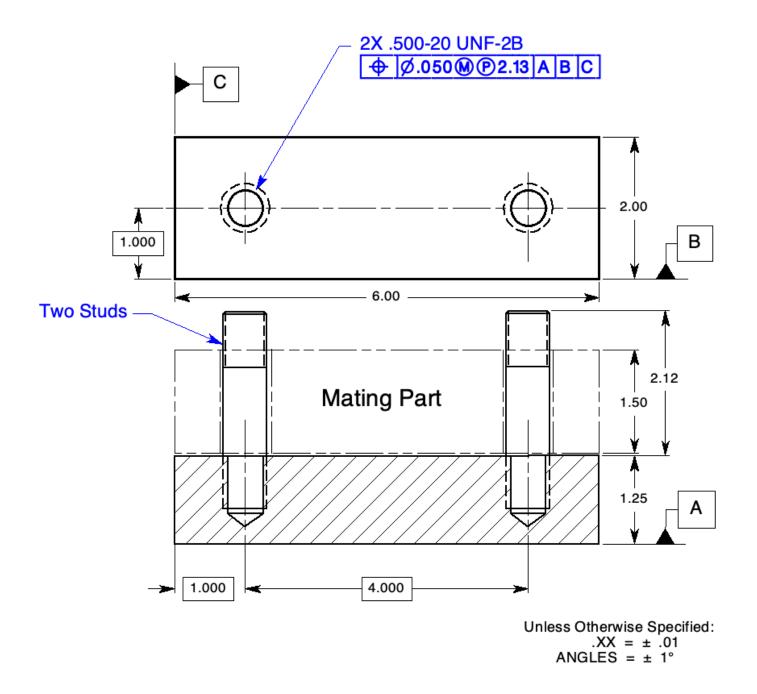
Projected tolerance zone for studs: Prob. 12.
